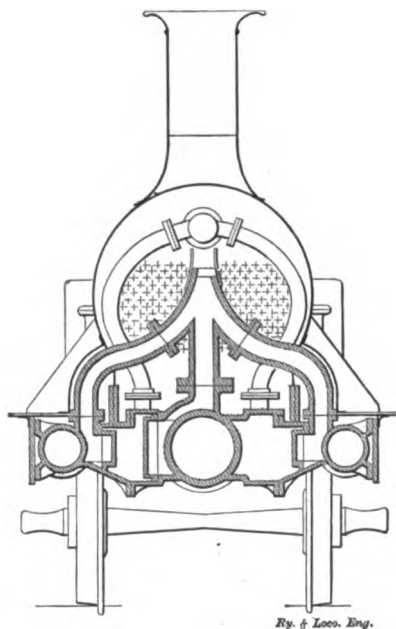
Stephenson & Howe's Three-Cylinder Engine
